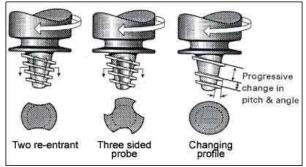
Basic variants of TWI's new generation of Whorl TM type FSW tools for welding thick work pieces (Stephan W. Kallee et al 2001).
